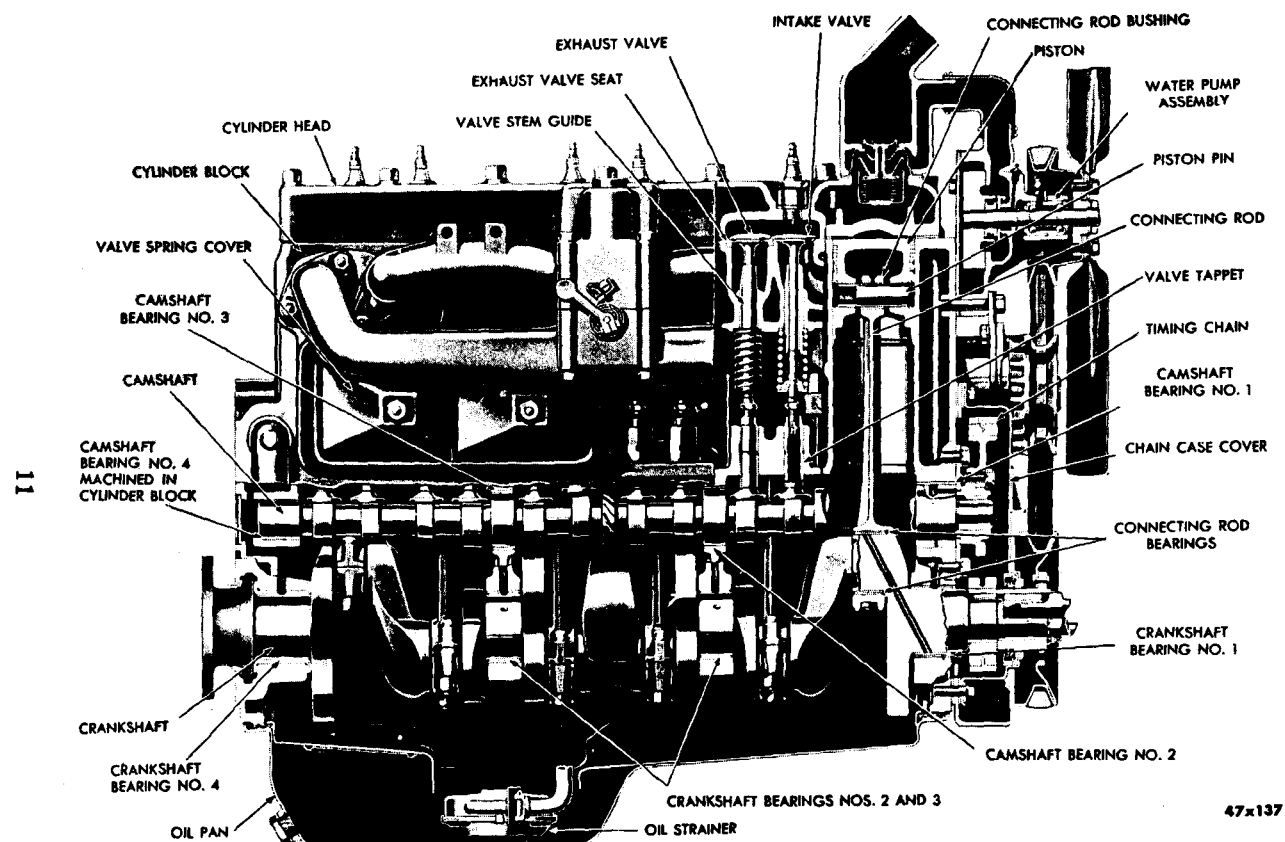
Chrysler 6-Cylinder Industrial Engine (Sectional View)
